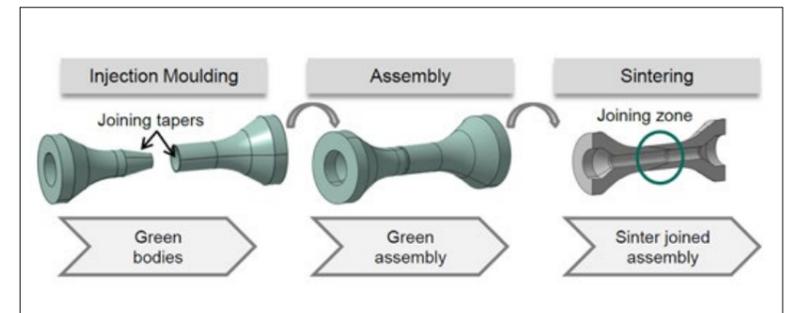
Geometry of samples for sinter joining experiments [12] [Courtesy EPMA]
